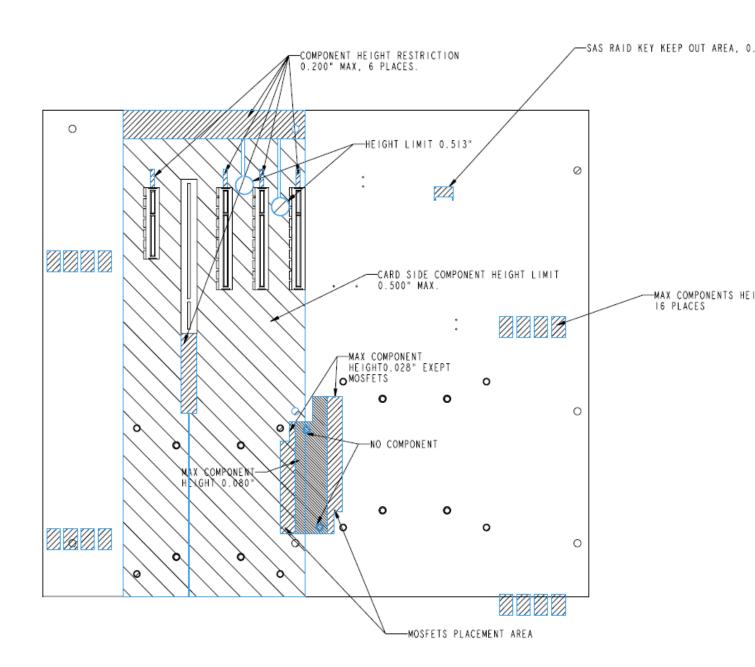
S5500BC Board PRIMARY SIDE CARD-SIDE KEEPOUT ZONE
